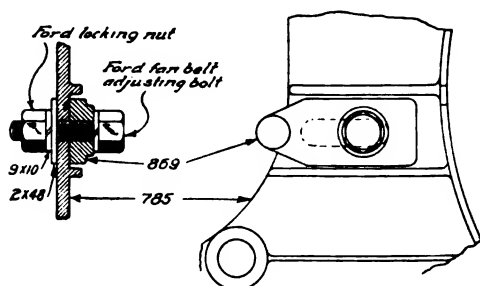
Correct Assembly for Belt Tightener for Heinze-Springfield Ford Installation
